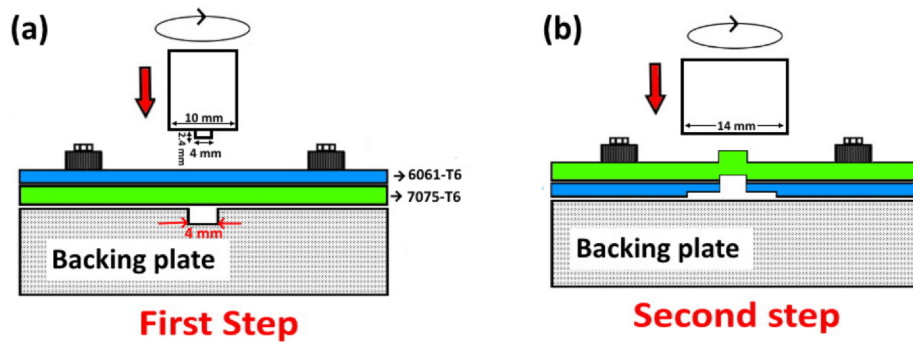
MFSC welding procedure for 6061-T6/7075-T6 joints (a) first step; (b) second step of MFSC.
